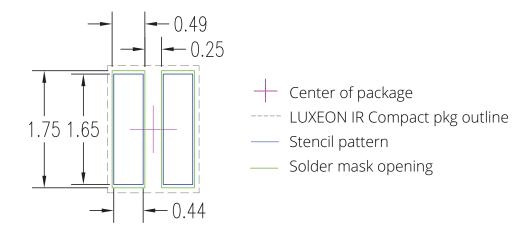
Recommended PCB solder pad layout for LUXEON IR Compact for Automotive Line.
